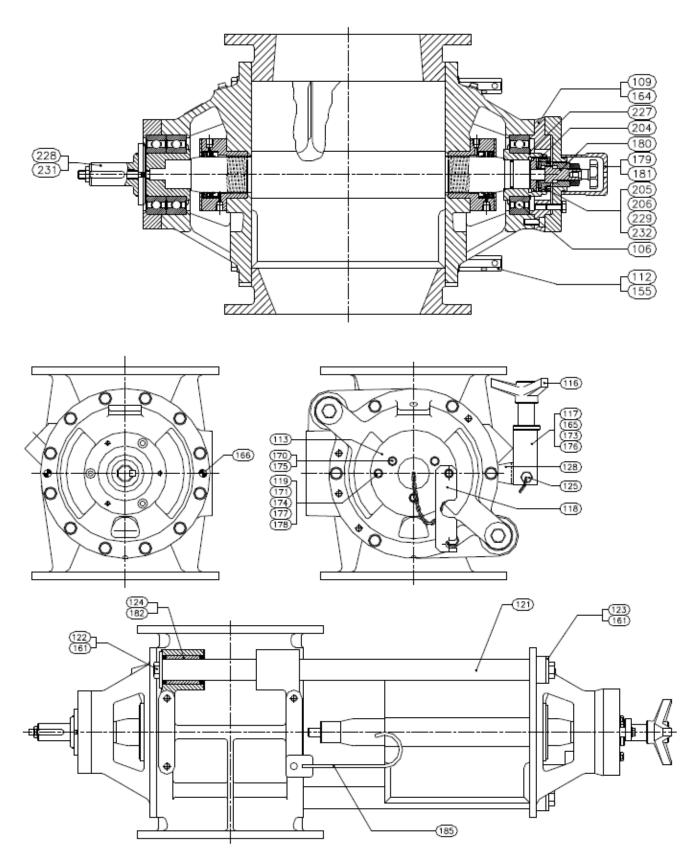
Drawing MZC parts (Dairy-EL I-MZC)
